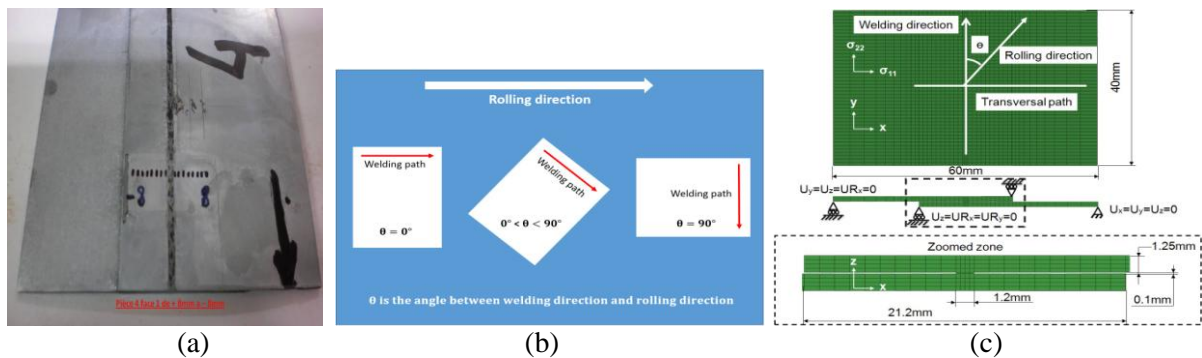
Experimental plates welding and ABAQUS/FEM numerical model: a) experimental plate welding along the rolling direction; b) Plates cut and welding patch using different orientations with respect to the rolling direction; c) Geometry and boundary conditions
